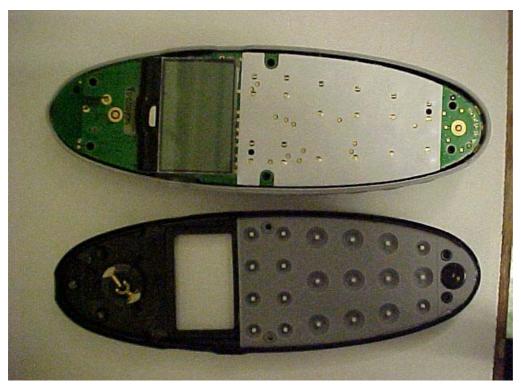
Visual inspection after splashing (one drop observed under keyboard membrane).
